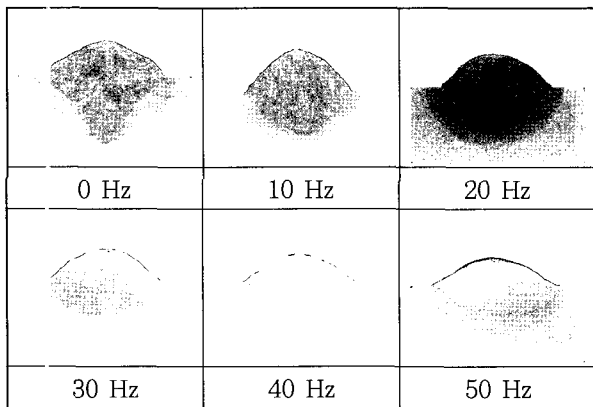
Cross-sectional bead shape for rotating arc welding (bead-on-plate welding, current : 270A, voltage : 31V, speed : 6mm/s, rotation diameter : 6mm)
